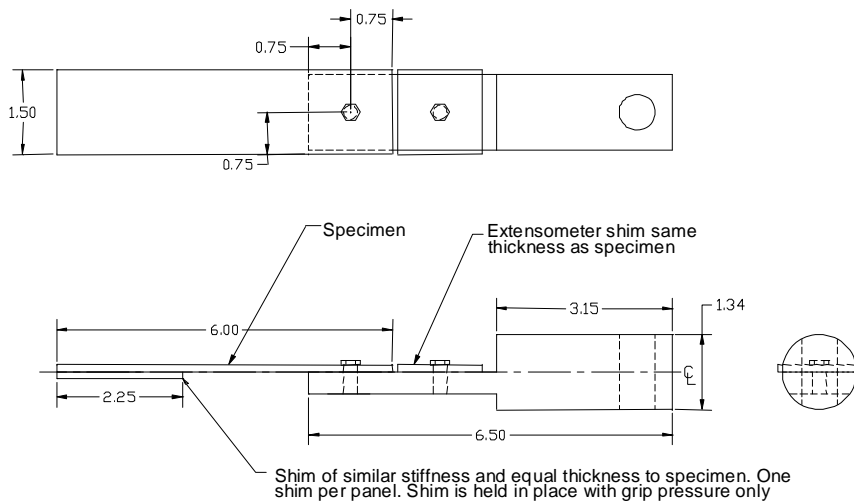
Modified ASTM D5961 (Pin Bearing) Specimen and Loading Arrangement
